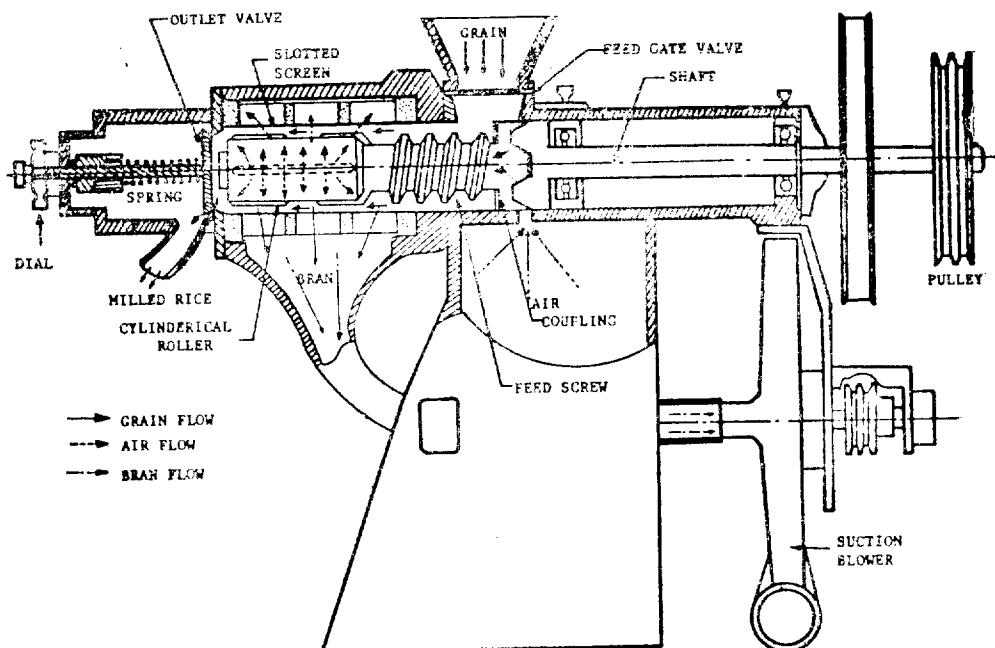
Schematic drawing of friction type whitening machine used for experiment.
